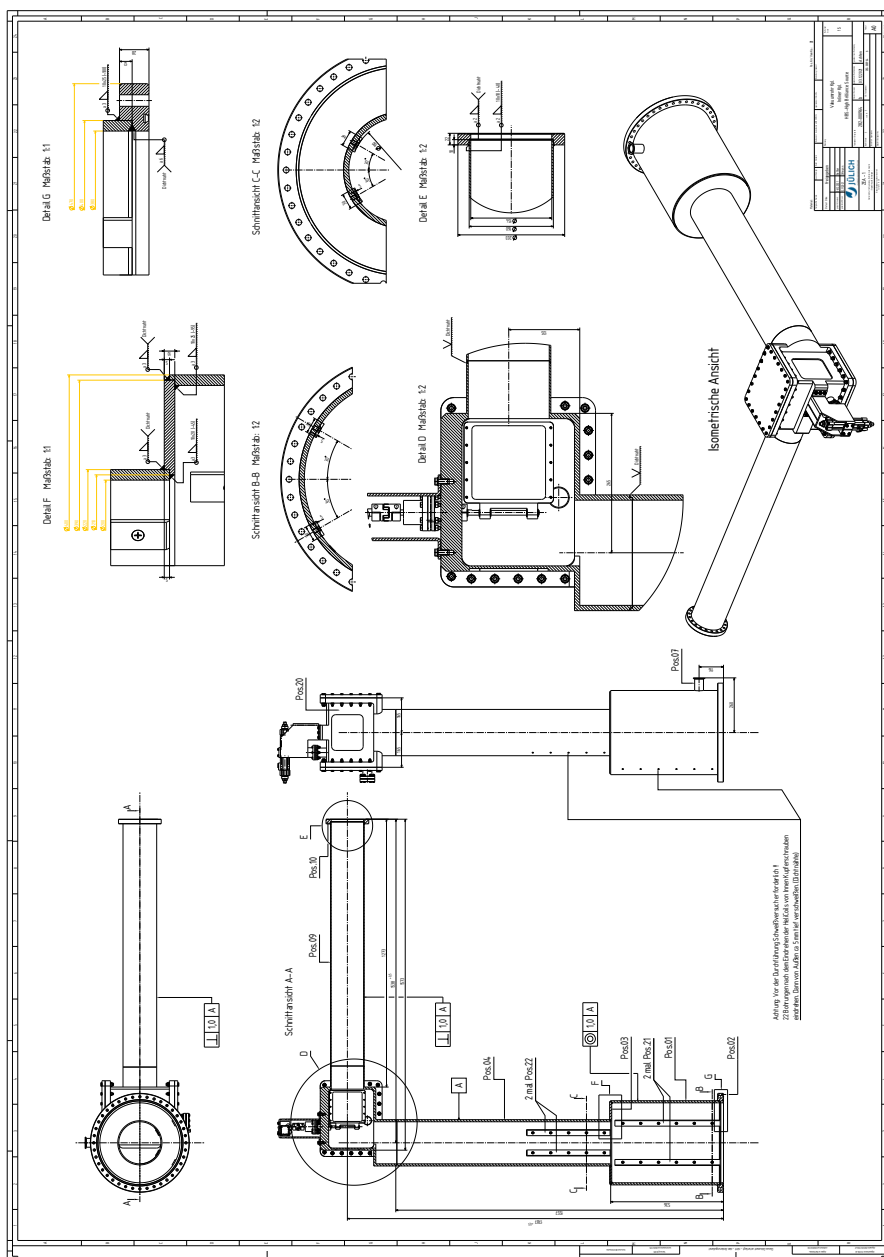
Technical drawing: cross sections and detailed views of the L-tube from the HBS target station prototype
